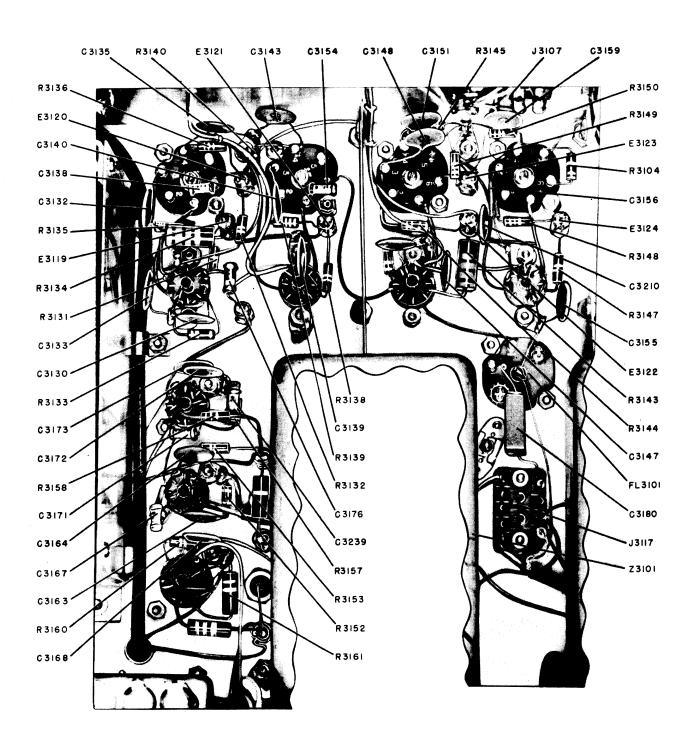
R-F Oscillator O-243/FRT-24, Section B, Location of Parts
